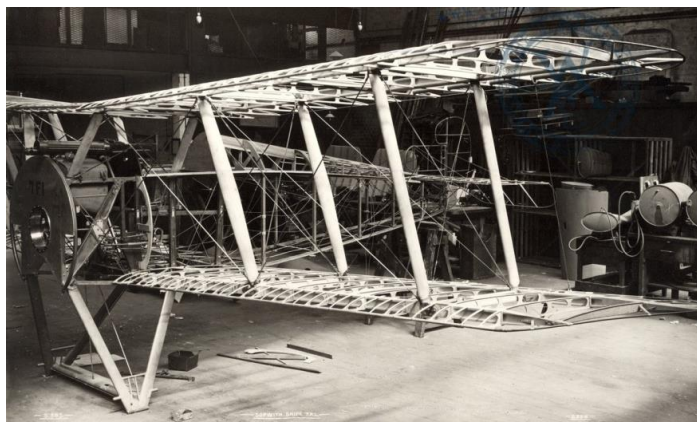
Internal structure of Sopwith Snipe. Note the wire-braced box-girder structure of the fuselage and the wire-trussed strut supported wing with an internal spar-and-rib structure.
